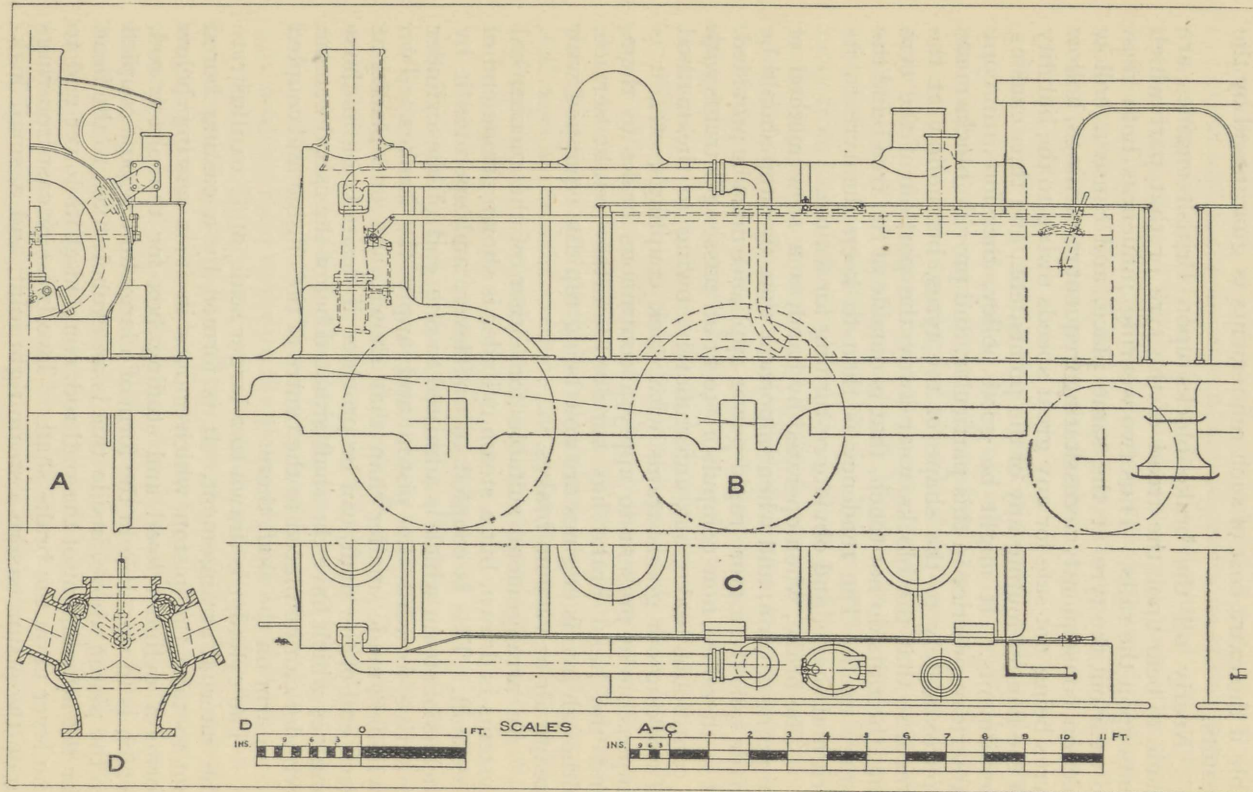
CONDENSING ARRANGEMENT FOR TANK ENGINE.
